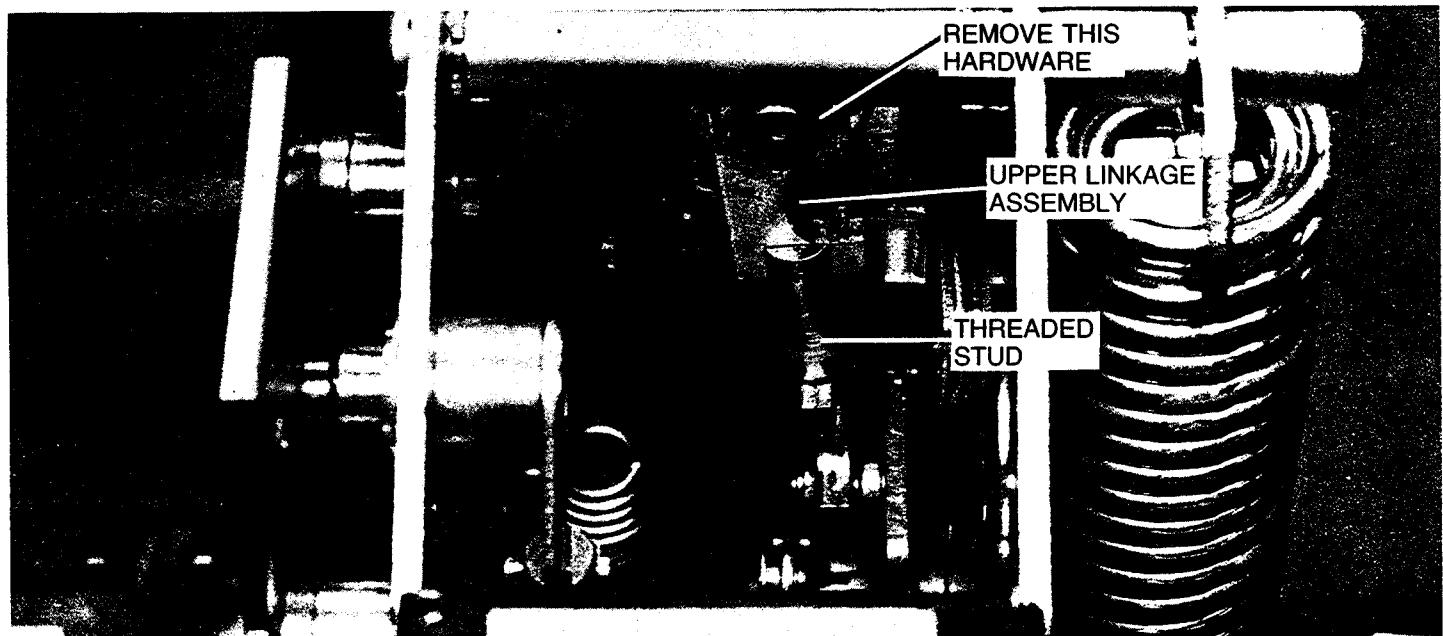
MANUAL HANDLE ADJUSTMENT
